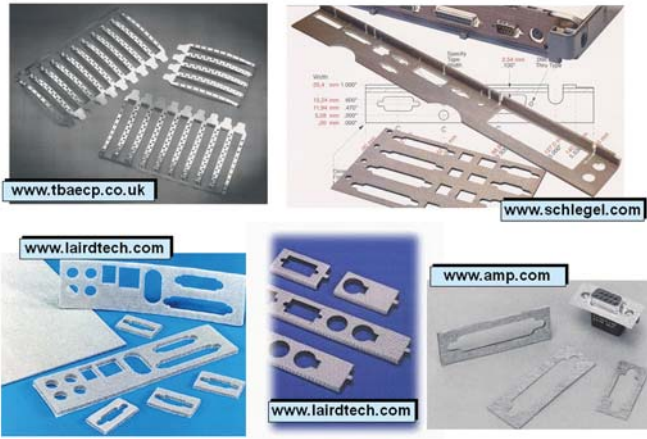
Examples of die-cut conductive gaskets suitable for bonding to PC chassis
